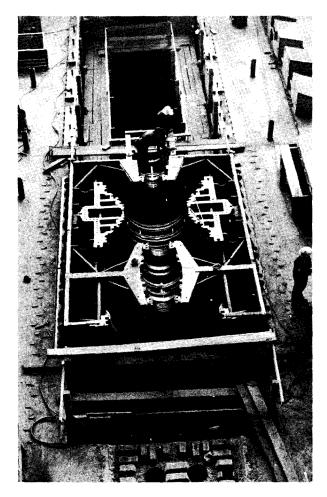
Low-pressure exhaust casing, unit 8, being aligned and placed on base plates in first step of assembly.
